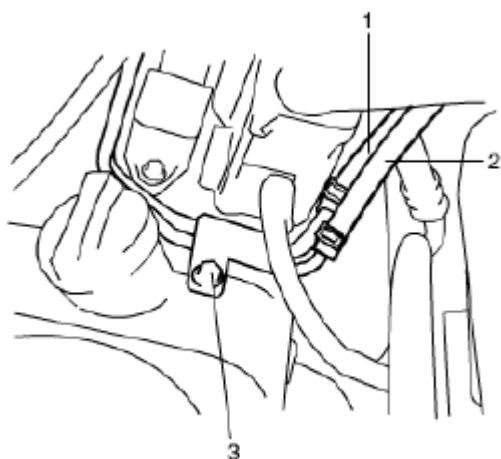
Identifying EGR Valve Assembly & PCV Pipe
